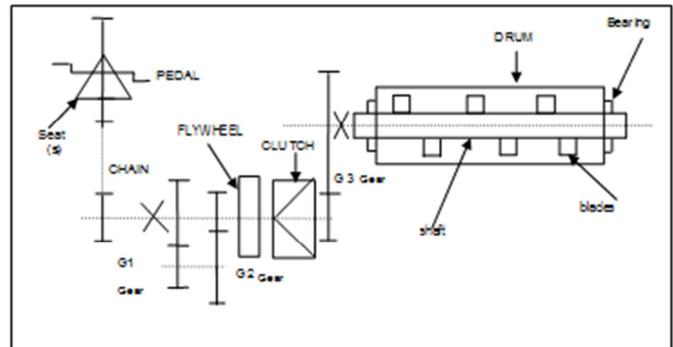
Schematic arrangement of a Nursery Fertilizer mixer machine.
